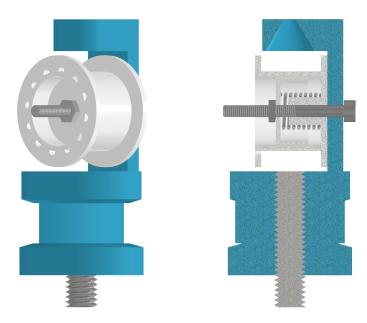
A spool assembly, half section view on the right. Cable is wound around the spool and the free end is threaded through the hole in the top of the spool holder. The spool rotates around a horizontal axle, this way no twisting of the cable occurs from unwinding the cable from the spool. The spring around the spool axle held by a bushing positioned by a lock nut applies force on the spool against the rising arm of the spool holder. Moving the lock nut adjusts the tension of the spool to prevent it from unwinding freely. An alternate design with a rewinder was considered to take up slack as the spool traveled through the central area of the track, but the slack didn't cause any issues so this simple friction clutch was used.
